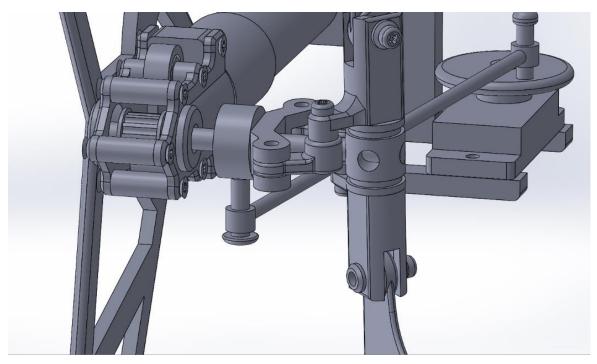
Slider and Rotor Blade Mechanism (Perspective 3).
